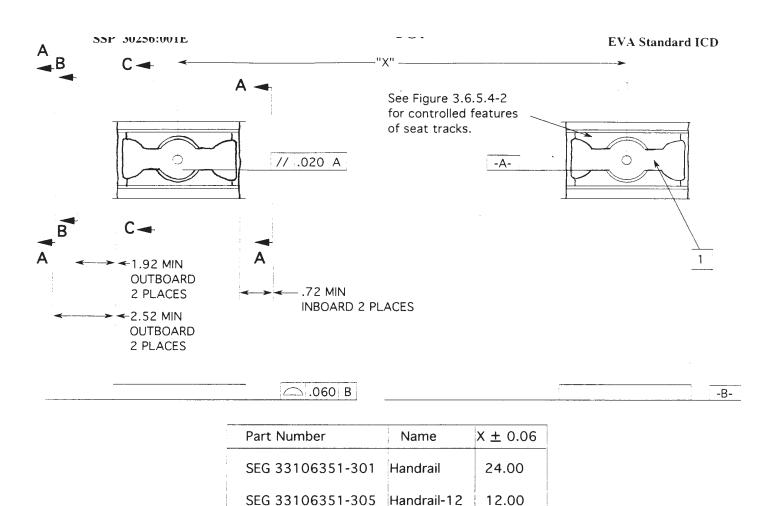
HANDRAIL CROSS SECTION (ON–ORBIT INSTALLED)
